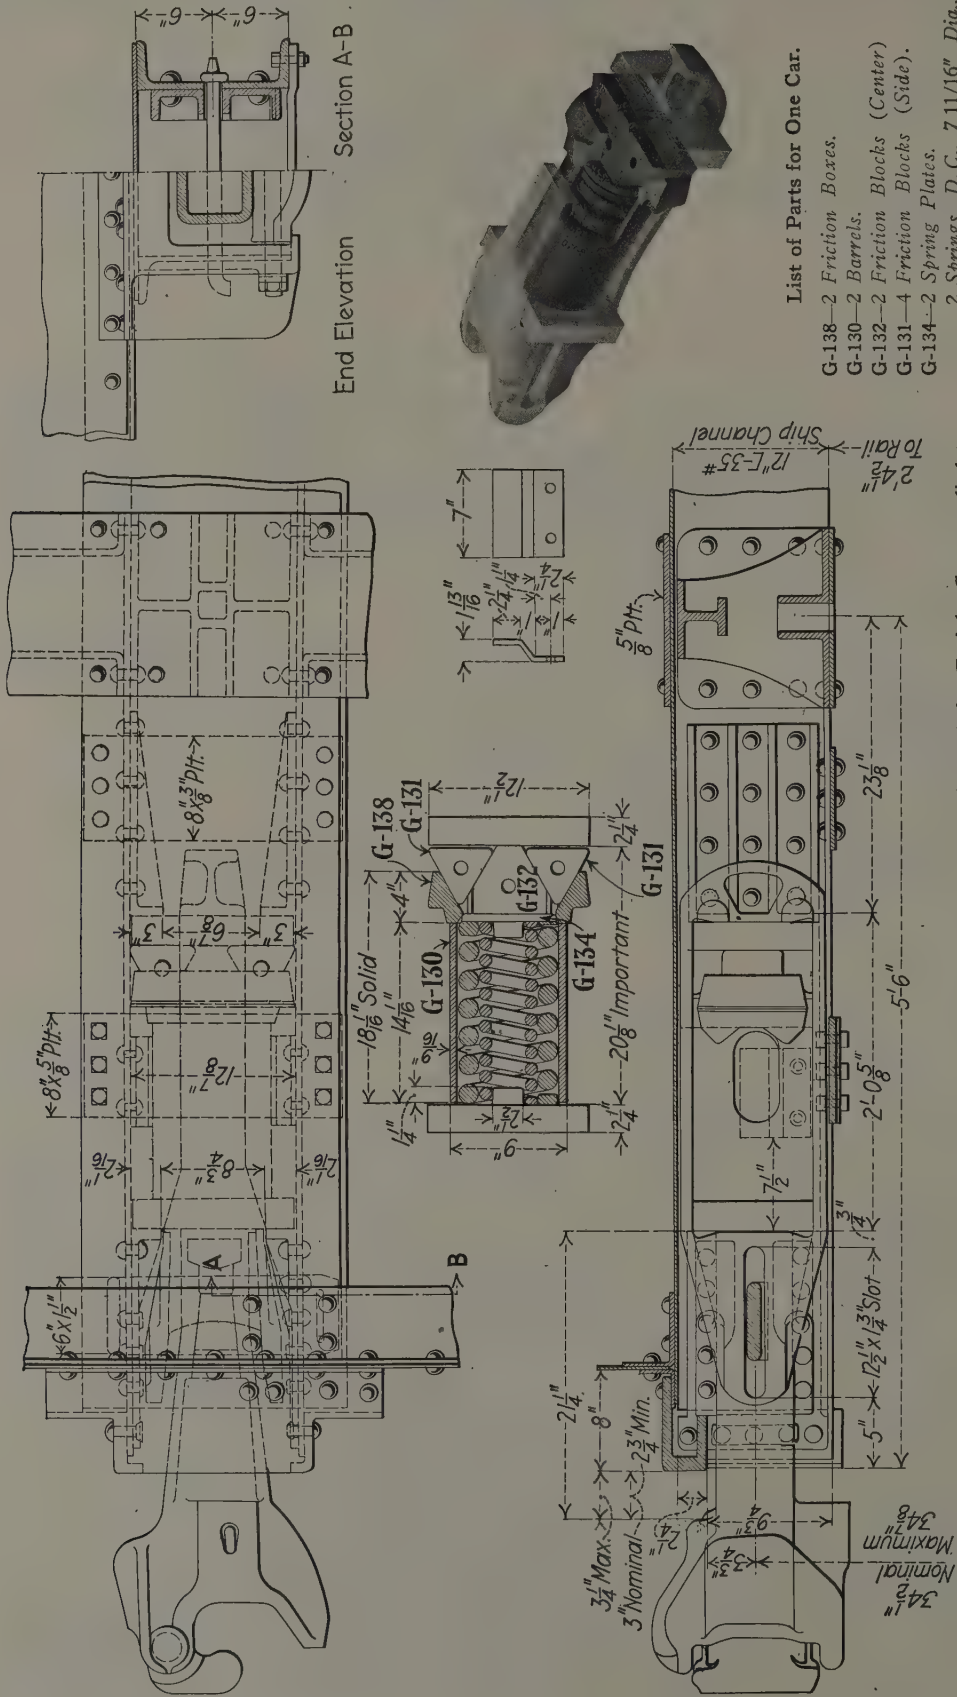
General Application of Universal Triple Key Yoke and Attachments for Class G Twin Springs. Universal Draft Gear Attachment Co.
